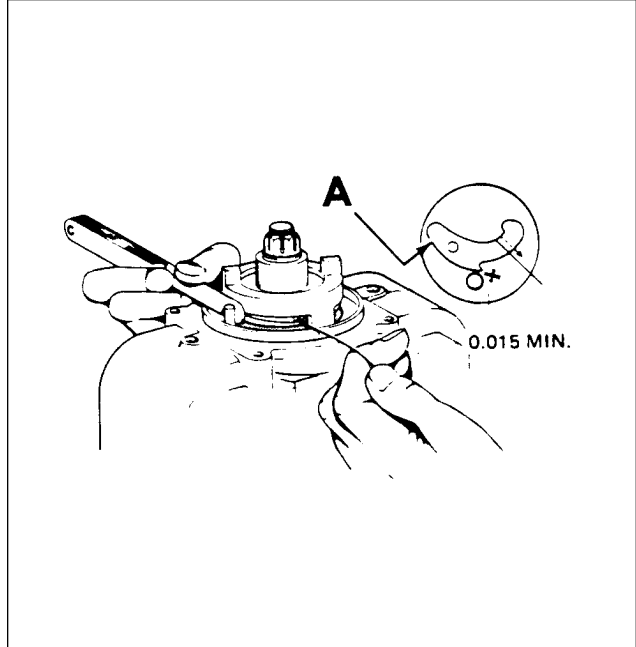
Checking Flyweight to Stop Pin Clearance
